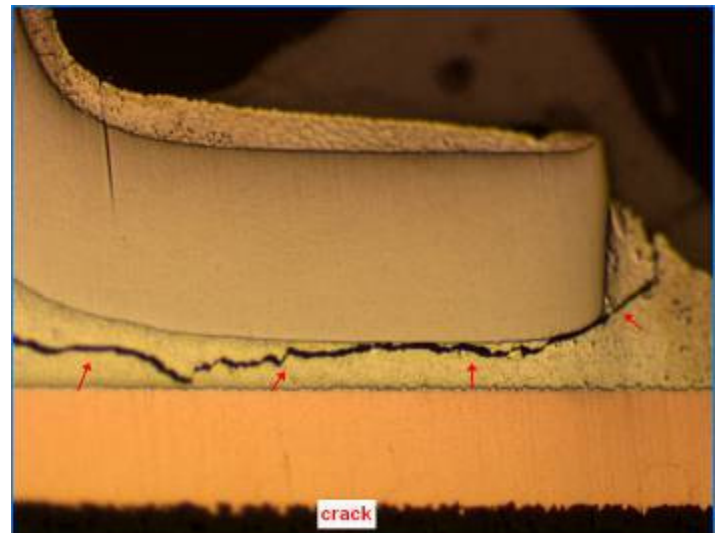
cross section, SN62, U61, right lead solder crack, 200x b
